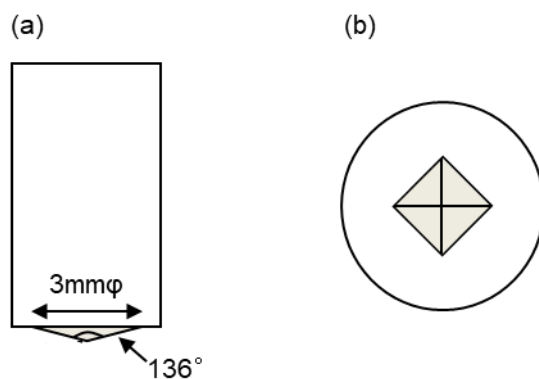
Schematic illustration of diamond indenter for the scratch test; (a)side view and (b) bottom view.
